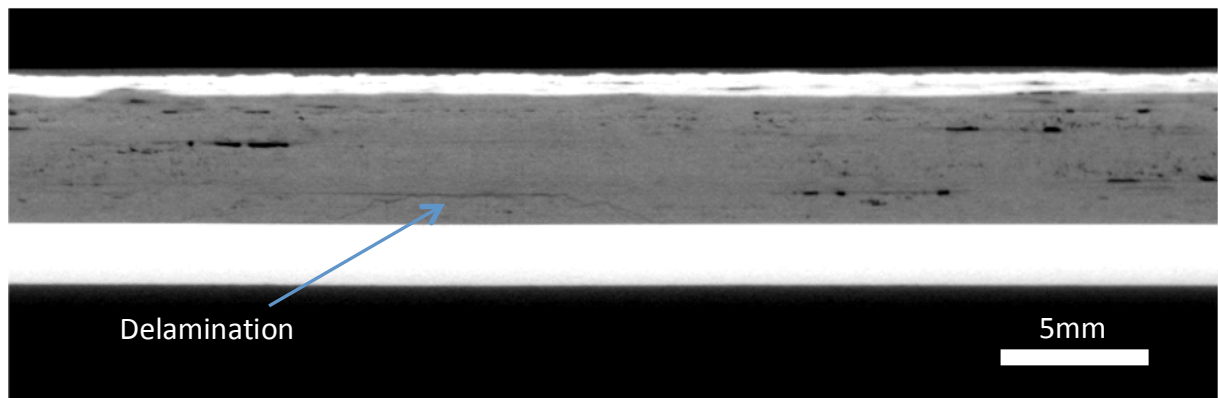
Longitudinal cross section, 5mm from indent centre at the 0.50 load step
